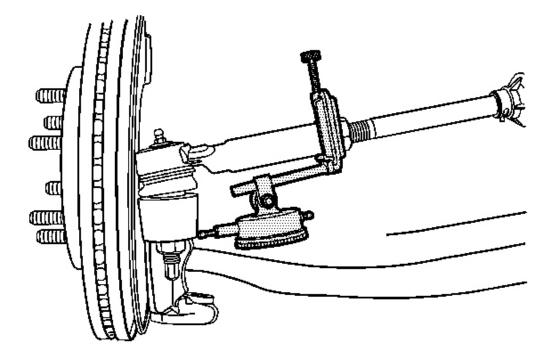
Checking Tie Rod-To-Steering Knuckle Lash Courtesy of GENERAL MOTORS CORP.
